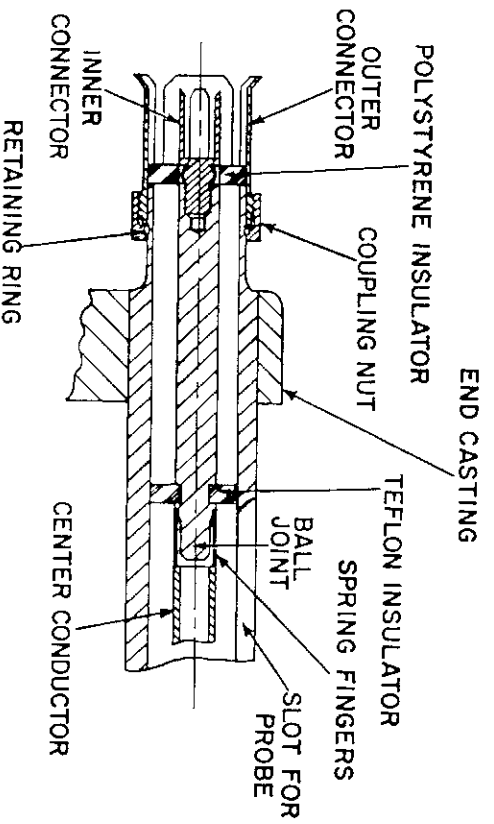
Sketch of end section of the line showing the supporting insulators and ball joint.
